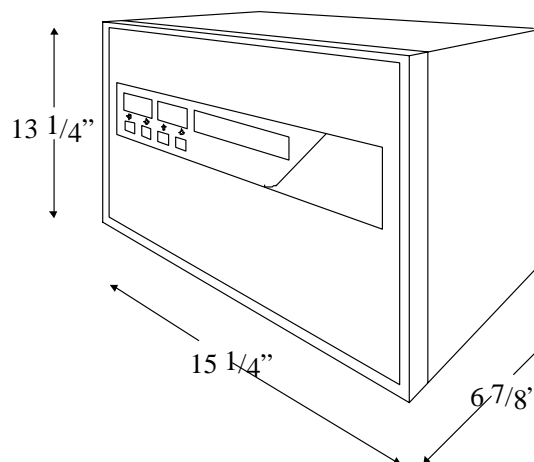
Dimensional and mounting layout of GasChek4 Mark II controller housing
